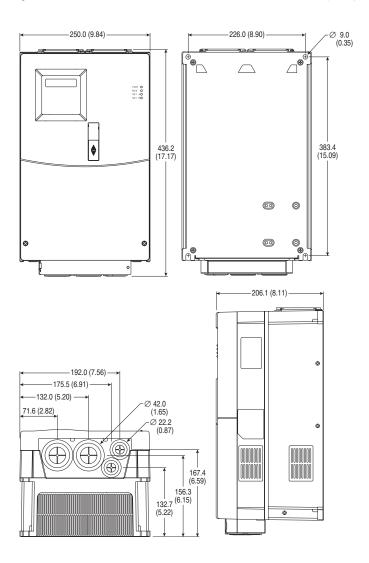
PowerFlex 400 Frame D Drive - Dimensions are in millimeters and (inches)
